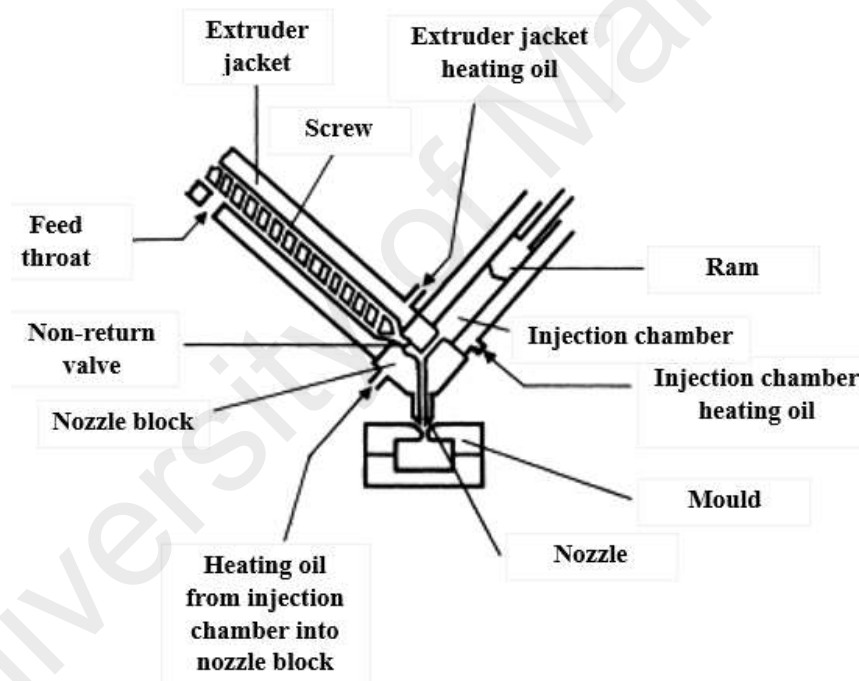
The out-of-line non-reciprocating screw type of rubber injection moulding machine. Schematic diagram from A.I. Isayev (1989).
